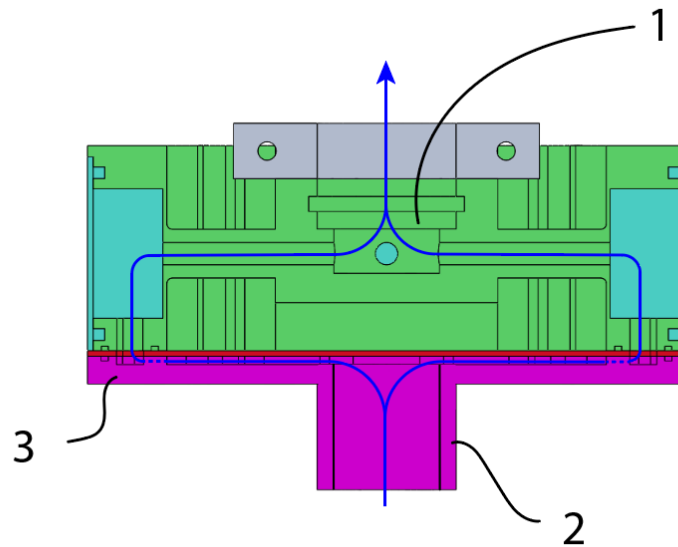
The cross sectional view of the designed sensor. Label one shows the connection point to the robot, label 2 shows the connection point for a gripper, label 3 shows the vacuum chamber that has to be clamped to the sensors main body. The blue line indicates the airflow path.
